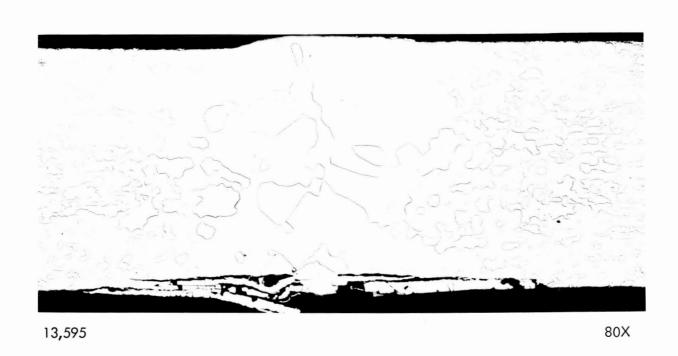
Typical Section of Electron Beam Weld in Unalloyed Tungsten
